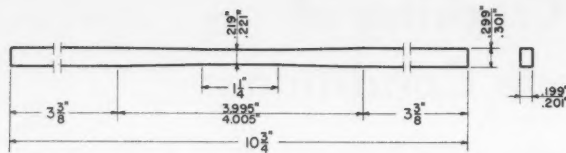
Tensile specimen for pre-stressed corrosion cracking test.
